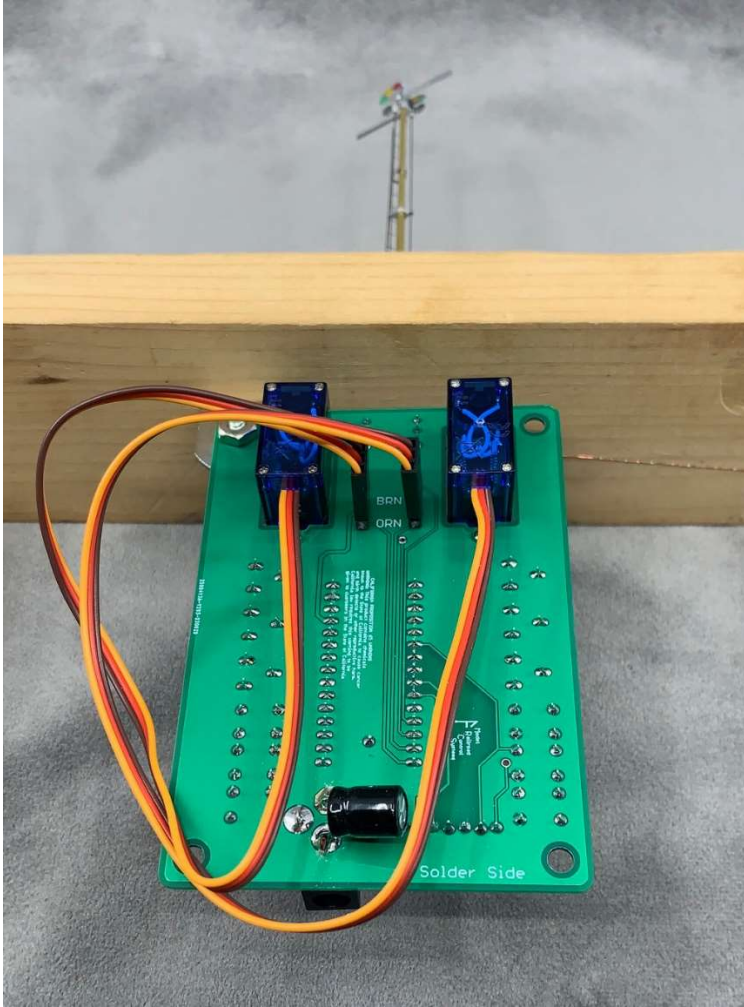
back side of PC Board - the capacitor at bottom is the prototype for V1.3
